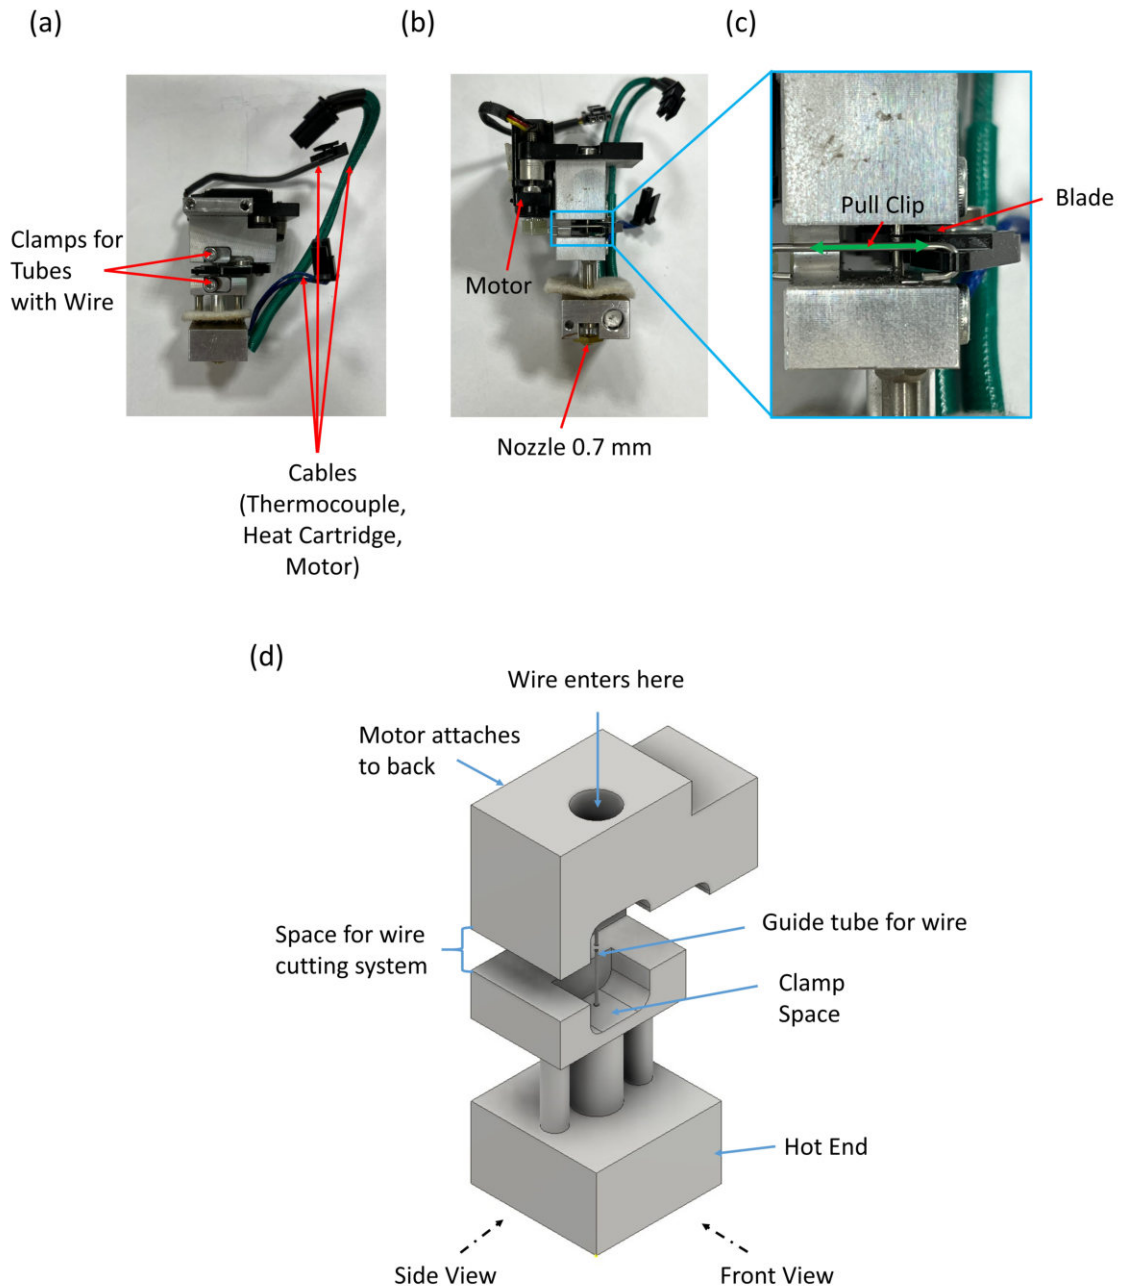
(a) Front view of the wire print head. It is mainly comprised of an aluminium piece shaped to allow for the blade to cut the wire. Clamps are used to hold the tubes in place as the wire passes through them. (b) Side view of the wire print head with the nozzle and the motor for controlling the blade being shown. (c) Detailed view of the cutting mechanism, can see the clip attached to the blade and the motor. (d) 3D model of the main housing of the wire print head.
